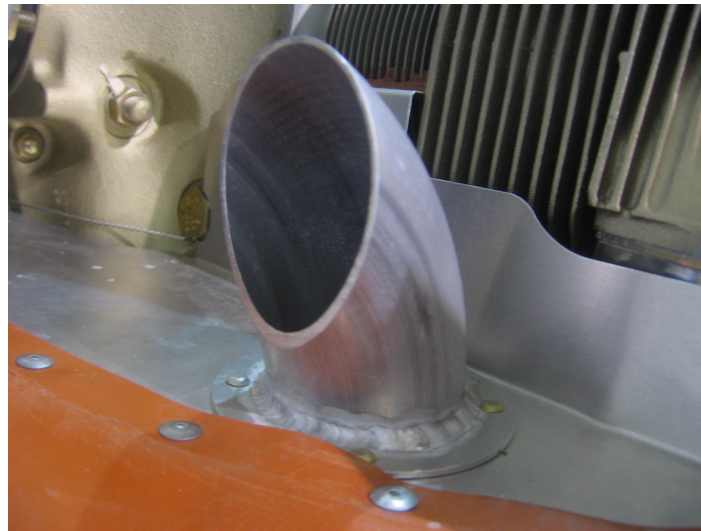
Cabin Heat Intake Assembly on Front Baffle
